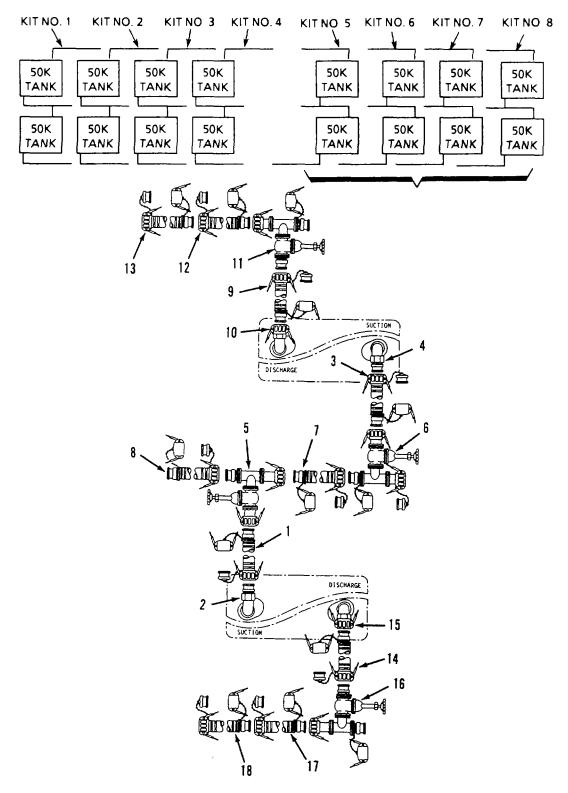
Dual Tank Connection Kit Assembly (sheet 2 of 2)
